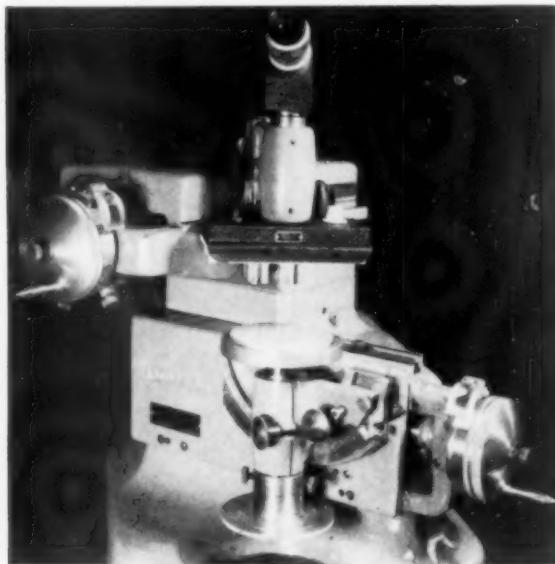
This coordinate measuring machine makes it possible to inspect work directly in terms of coordinate dimensions.
